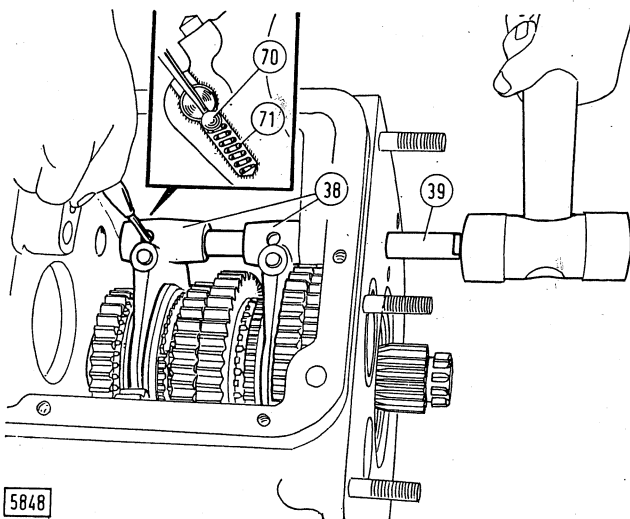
Fitting the shifter forks (38) bar (39).
